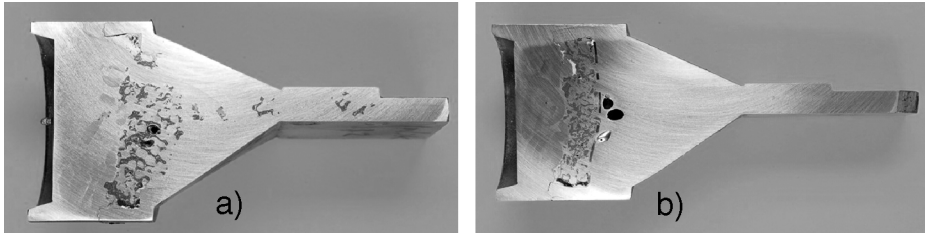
(a) Broken ceramic foam filter in Squeeze Casting on an HVSC machine. As shown in (b) a proper filter holder can prevent fracture, but in any case porosity was introduced behind the filter [Schie05].
